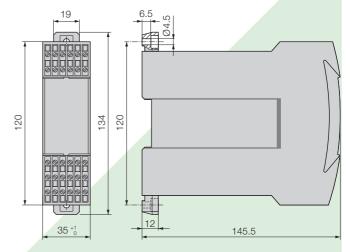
SINEAX VC 603 in housing S35, with the screw hole brackets pulled out for wall mounting.
